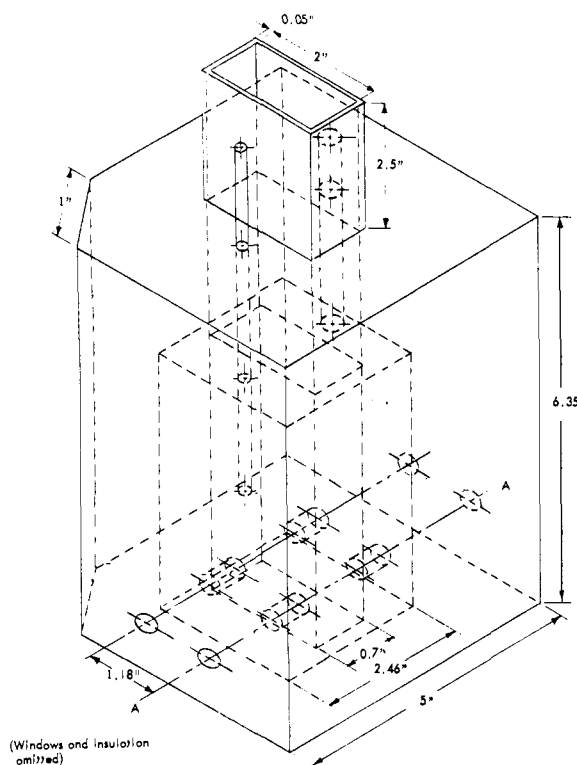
Isometric and cross-sectional views of the thermostated cell-holder.
